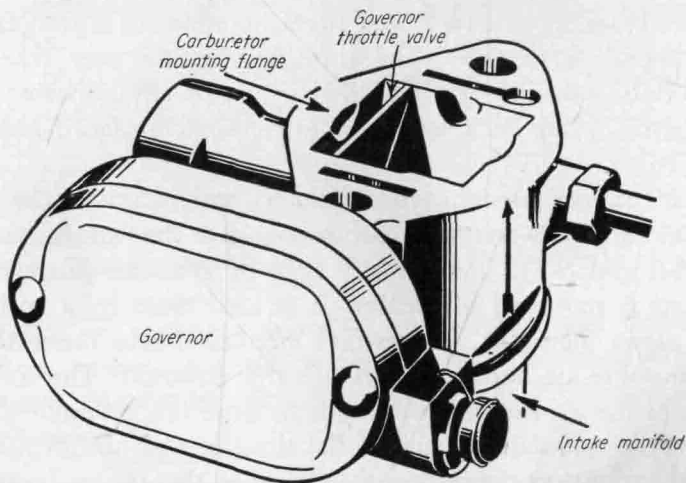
Velocity, or vacuum, type of governor with carburetor removed to show governor throttle valve.
